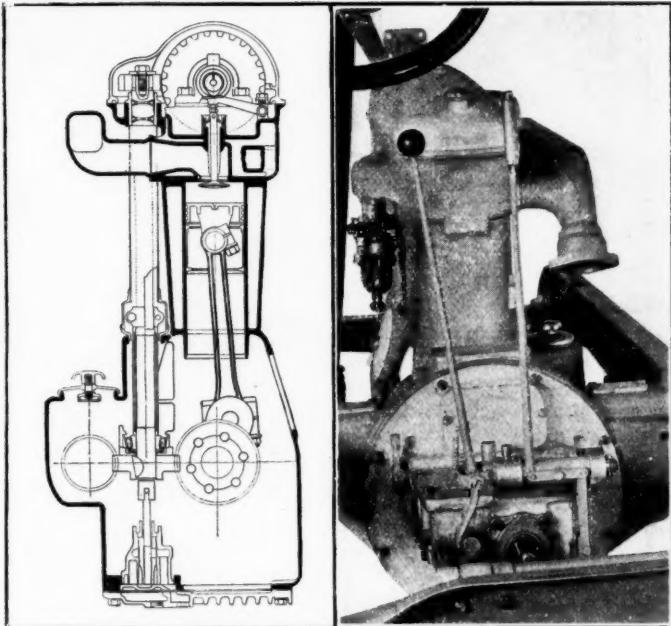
End section and rear view of Weideley motor with cylinders 3½ by 5½ inches. Note crosshead piston in which the top part taking the pressure of the explosion is separate from the skirt portion which serves as a guide. Note overhead camshaft, together with complete covering for same. At the right are shown the cylinders and crankcase in one casting.
